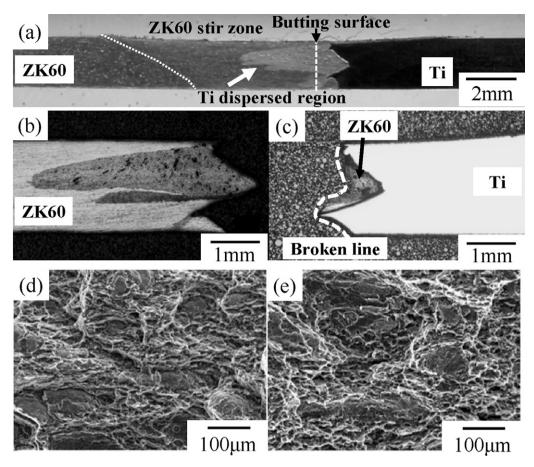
Appearances of the Ti and ZK60 joint at travel speed 50 mm/min in probe offset 1.5 mm: (a) cross-sectional macrostructure, cross-sectional macrostructure after tensile test (b) ZK60 side and (c) Ti side, (d) fractured surface of ZK60 side, (e) fractured surface of Ti side.
